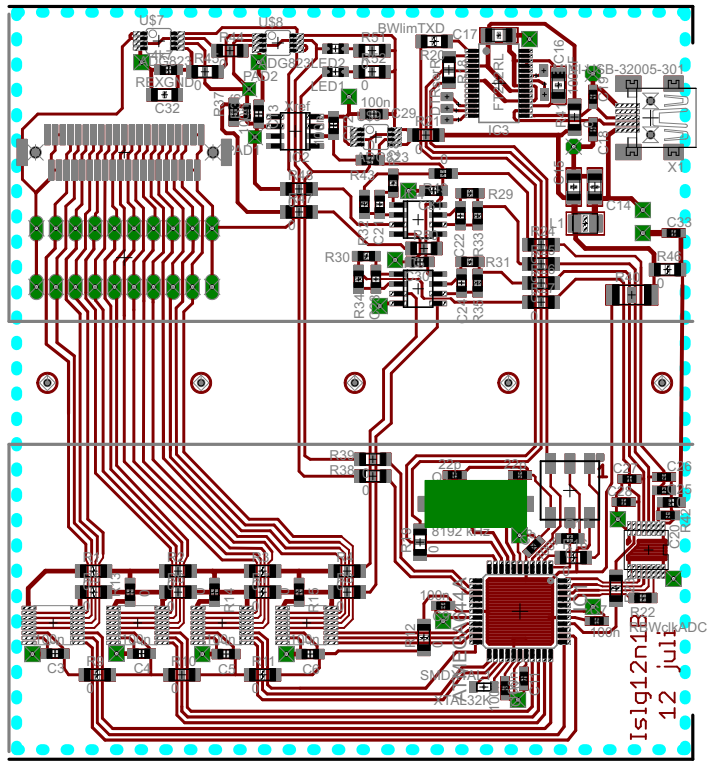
The reshaped interface electronics, which is mounted on the probe PCB and hold between the Lexan cylinder halves with holes for the reinforcing fasteners.
